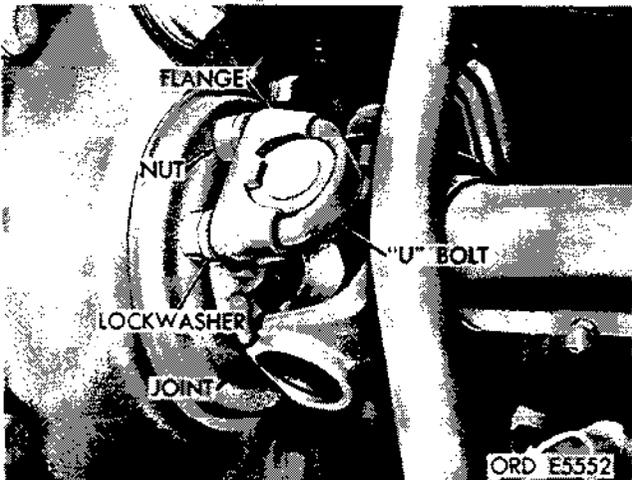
Remove drive shaft universal joint from differential drive flange.
